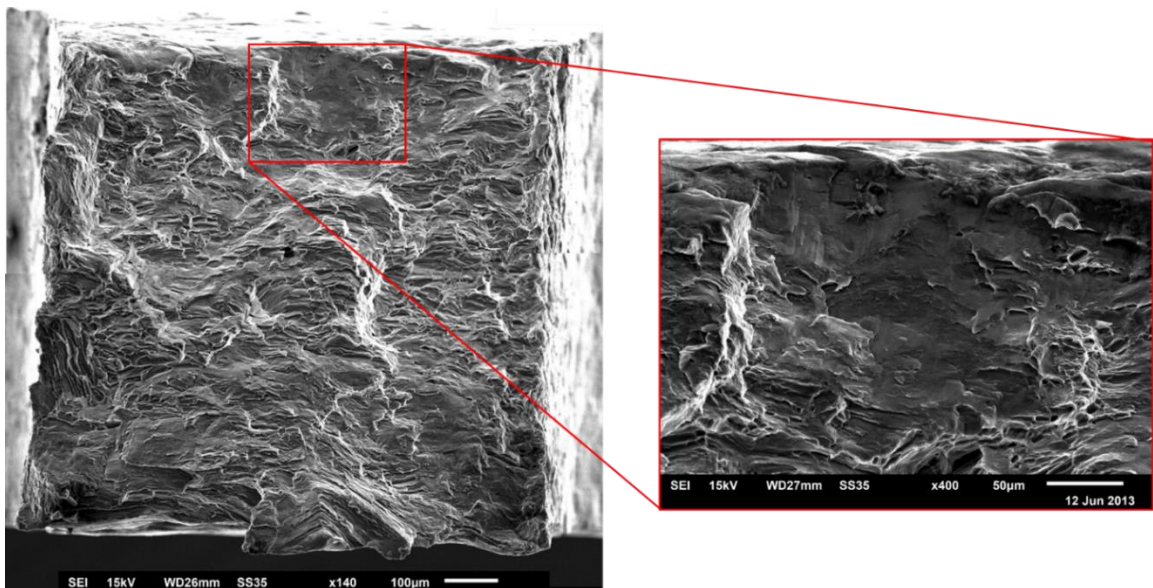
Fracture surface of tomography sample and magnified view showing the irregular characteristics.
